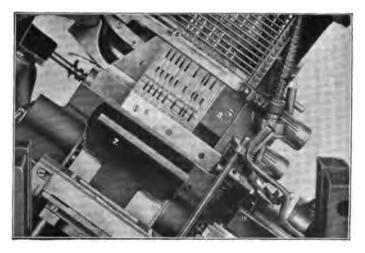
Typograph; matrices line-justified ready for casting. [To face plate LXXXI.
